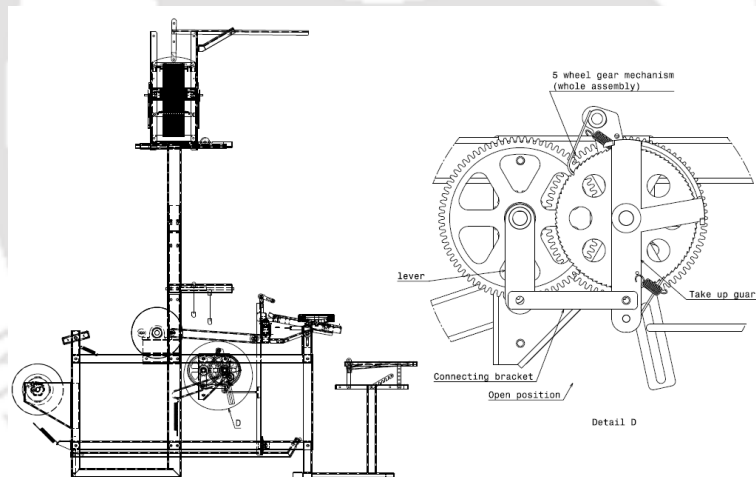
Side view of a semi-automatic handloom with a detailed view of the 5-wheel gear mechanism (side view) for take-up
